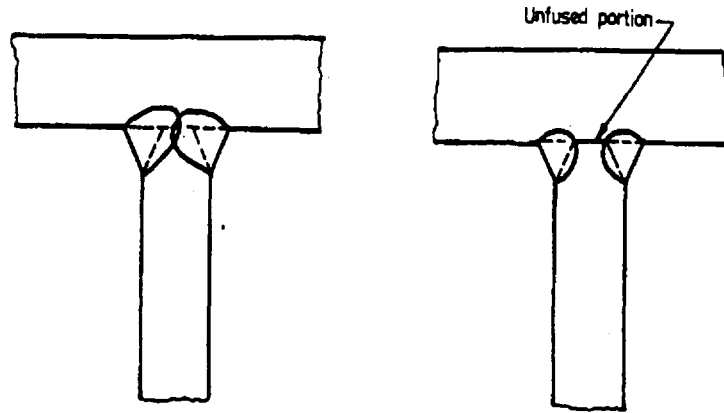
(a) Fully penetrated weld, (b) Partial penetration weld.
